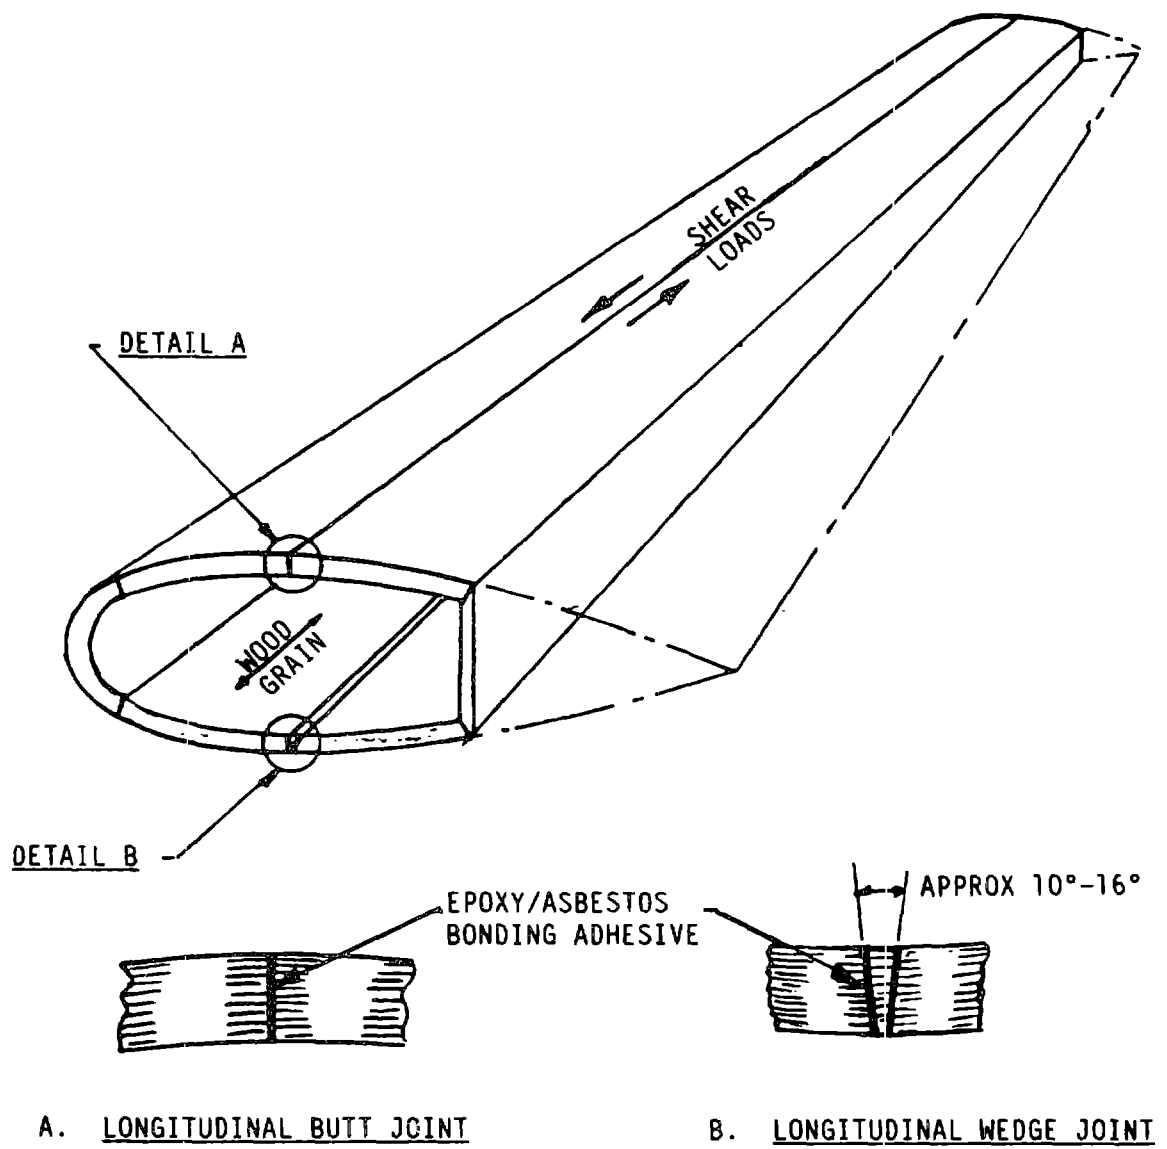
MOD-5A Rotor-Panel Assembly-Alternate Joint Concepts
